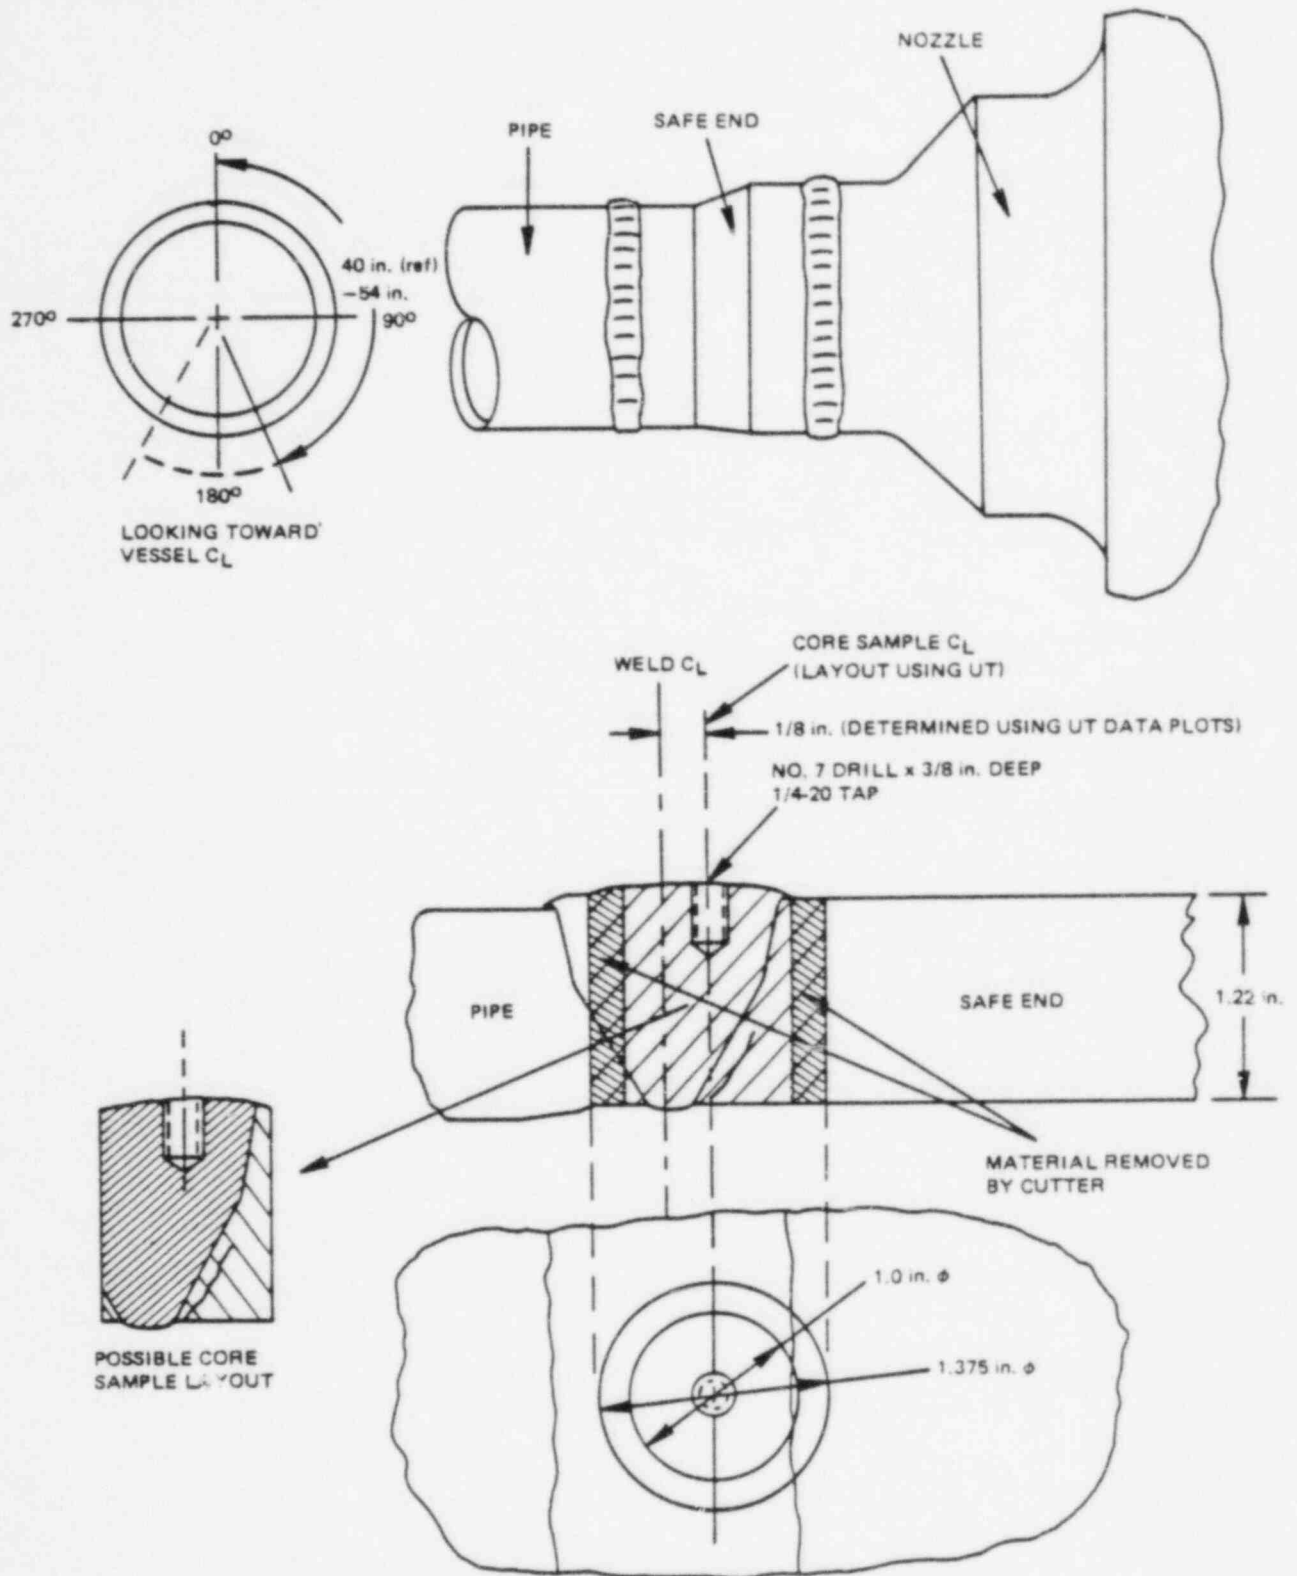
Schematic Showing Core Sample Location Plan and Top and Cross-Section Views of Possible Sample
